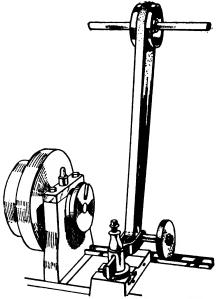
Method of Rigging up Grinder on Lathe Courtery of "Motor World"
